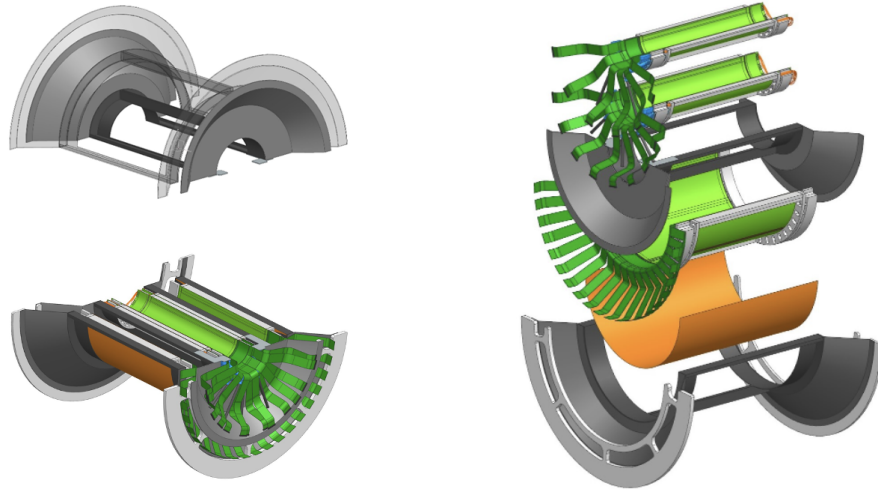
Left: CAD representation of the IB global support (top) and IB half-barrel CAD view with sensors and cable routing (bottom). Right: Exploded CAD view of IB. The orange element is the kapton shield. In blue the air conveyors are shown.
